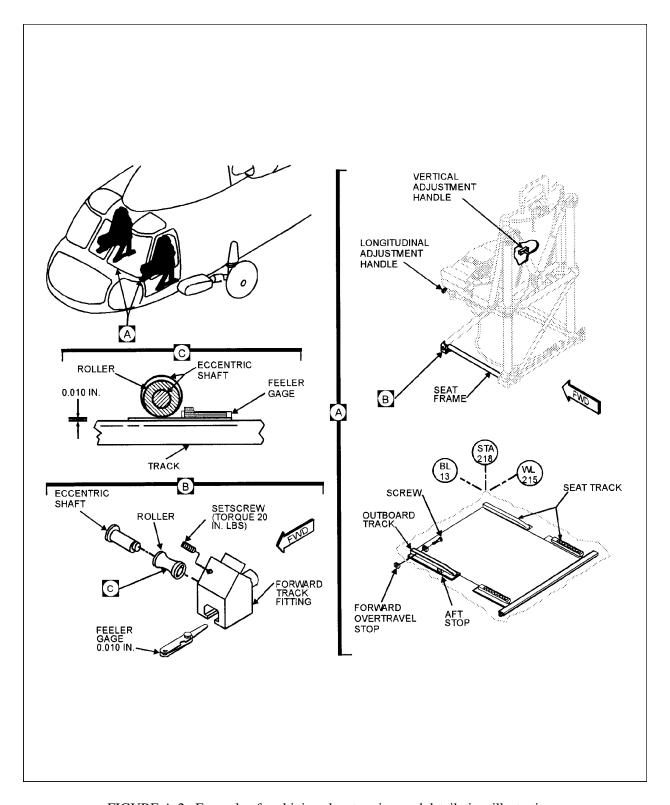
Example of multiview, locator view and detail view illustrations.
